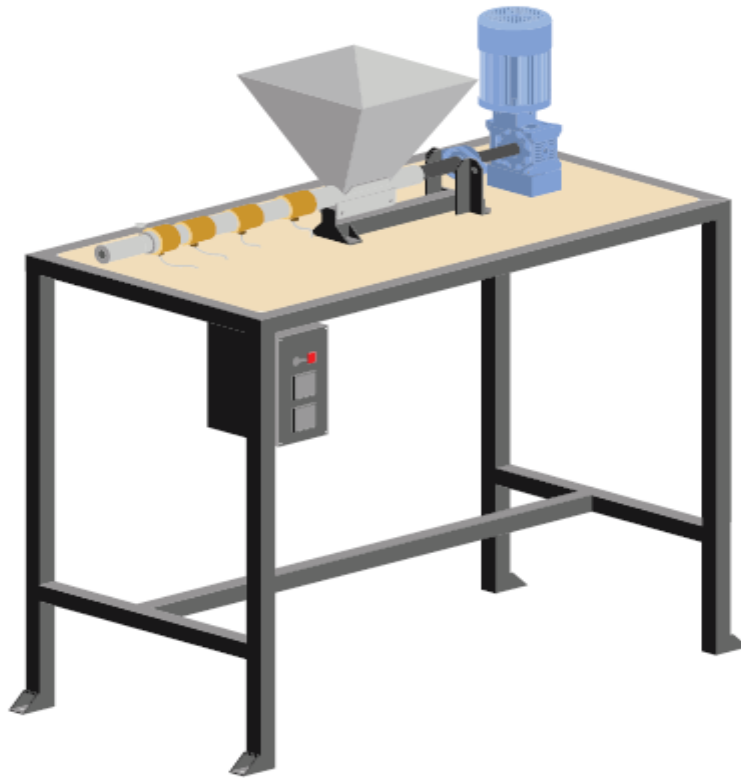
Structure Design of the Extruder Machine in 3D.
